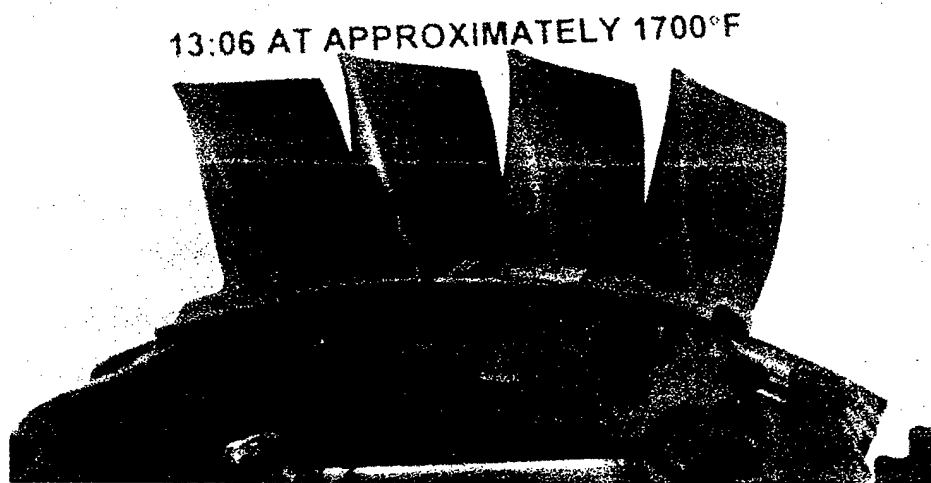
Leading edge view of the test blades after 13.1 hours of burner rig exposure at 1700°F. Ultramet coating is on the second blade from the right.
